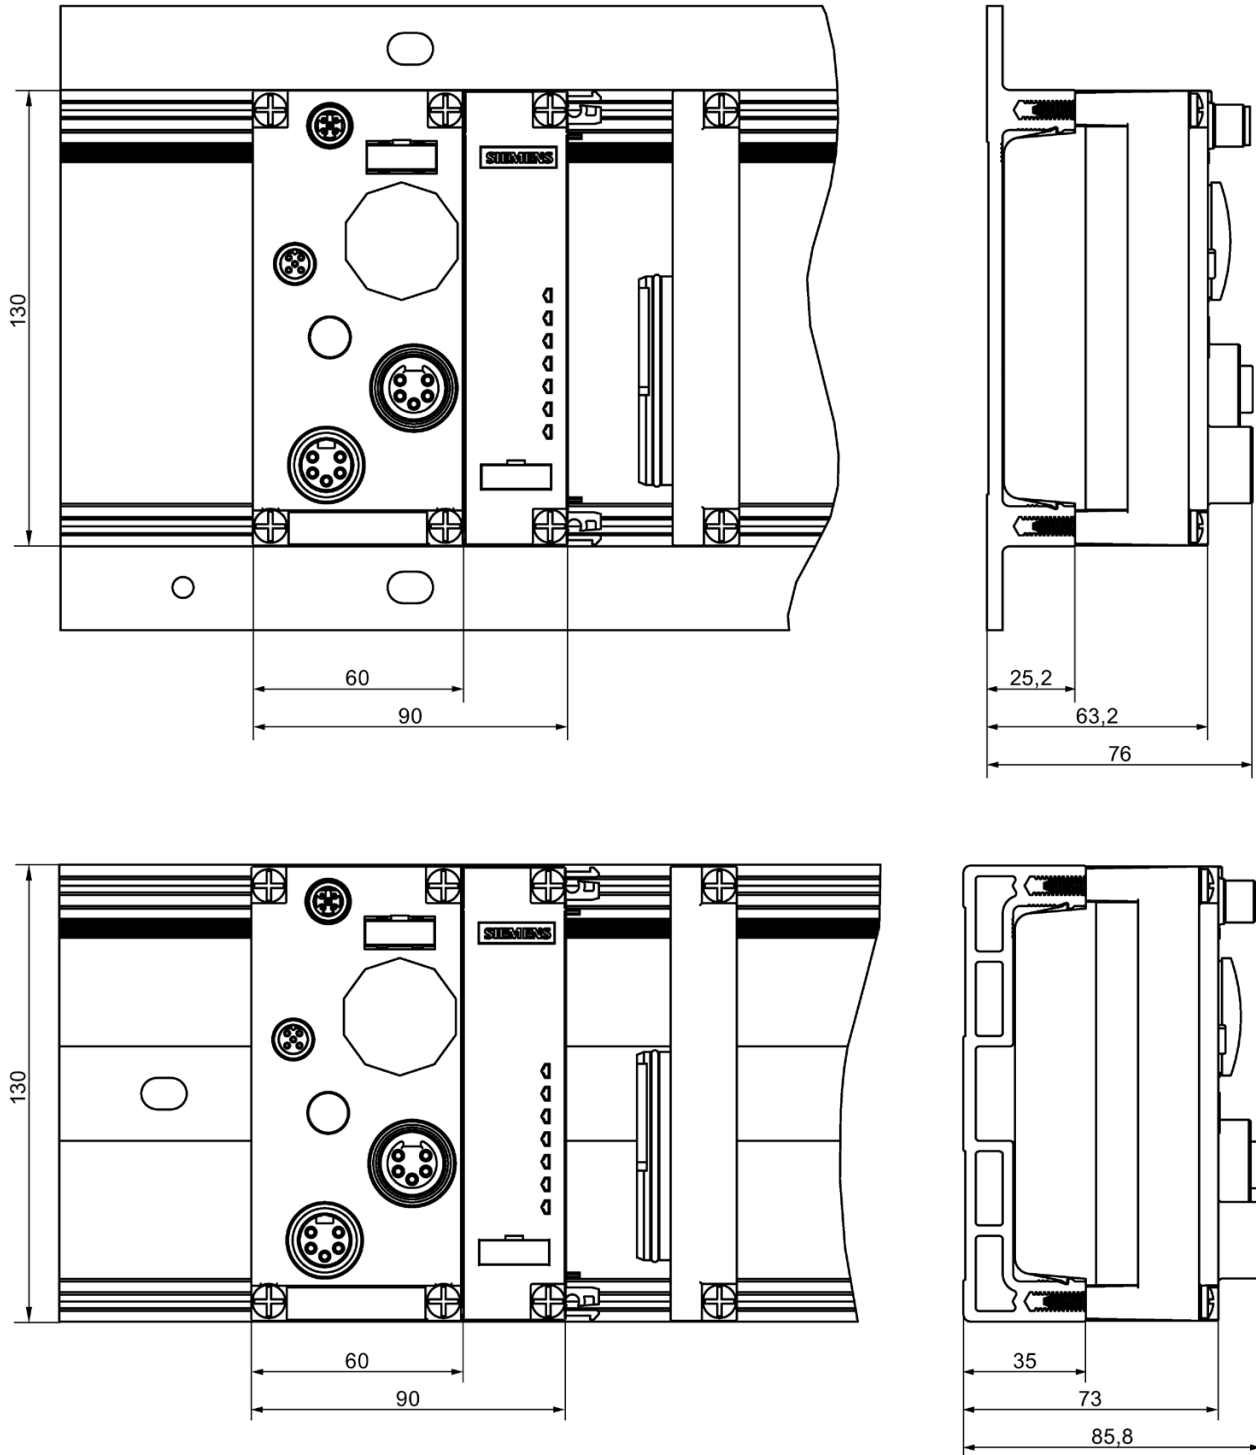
Dimensional drawing of IM 154-2 DP High Feature interface module with CM IM DP M12, 7/8" connection module
